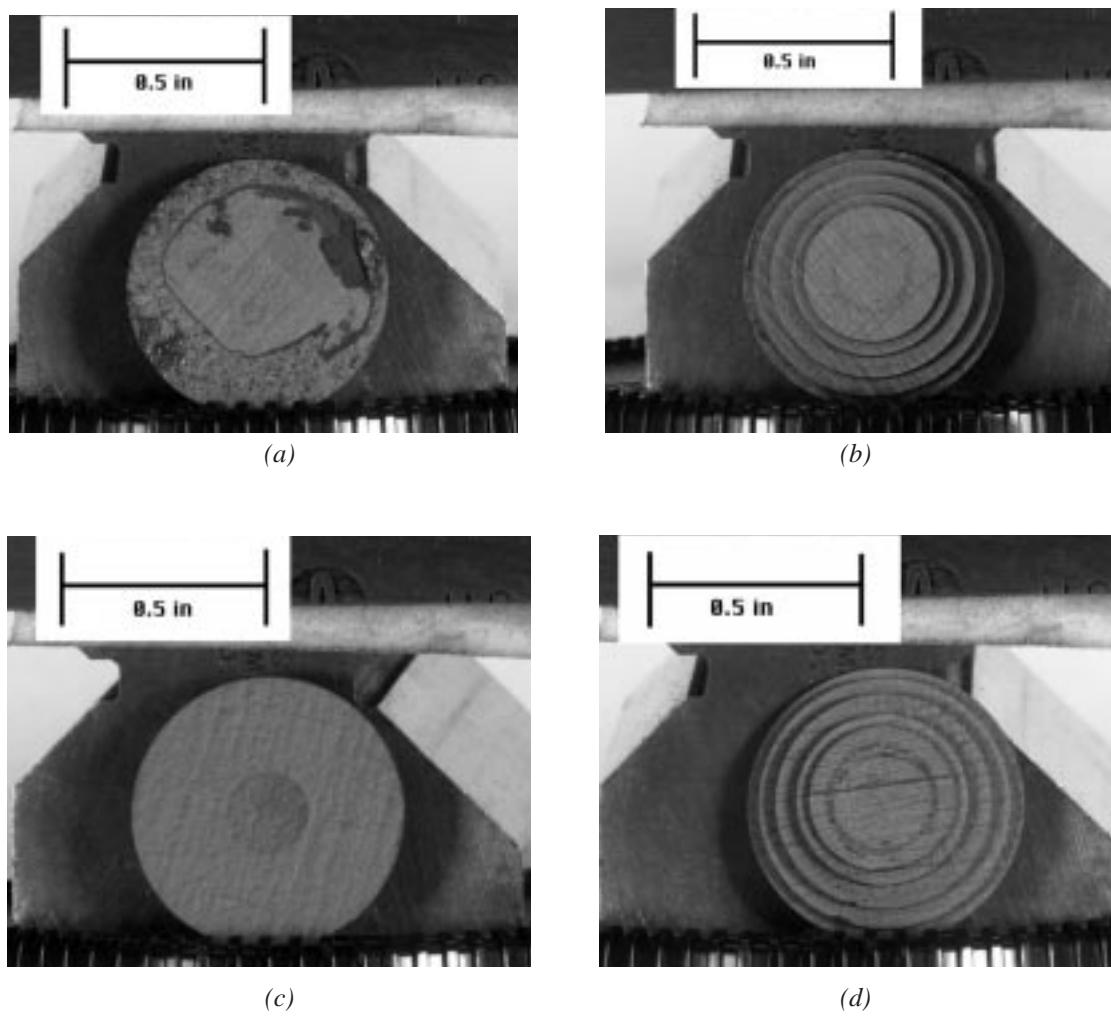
Pyrolytic graphite insulator tube plugs: (a) open end plug, exterior surface; (b) open end plug, interior surface; (c) blind end plug, exterior surface; (d) blind end plug, interior surface.
